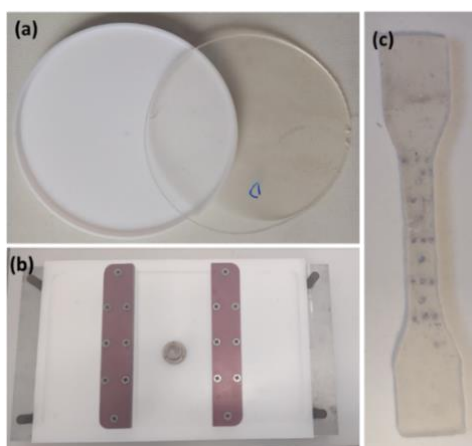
Elastomeric sheet obtained by (a) round-shape and (b) rectangle mold; (c) dog bone specimen.
